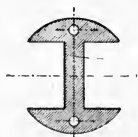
Centre Stampings for Laminated Shuttle Armature.
